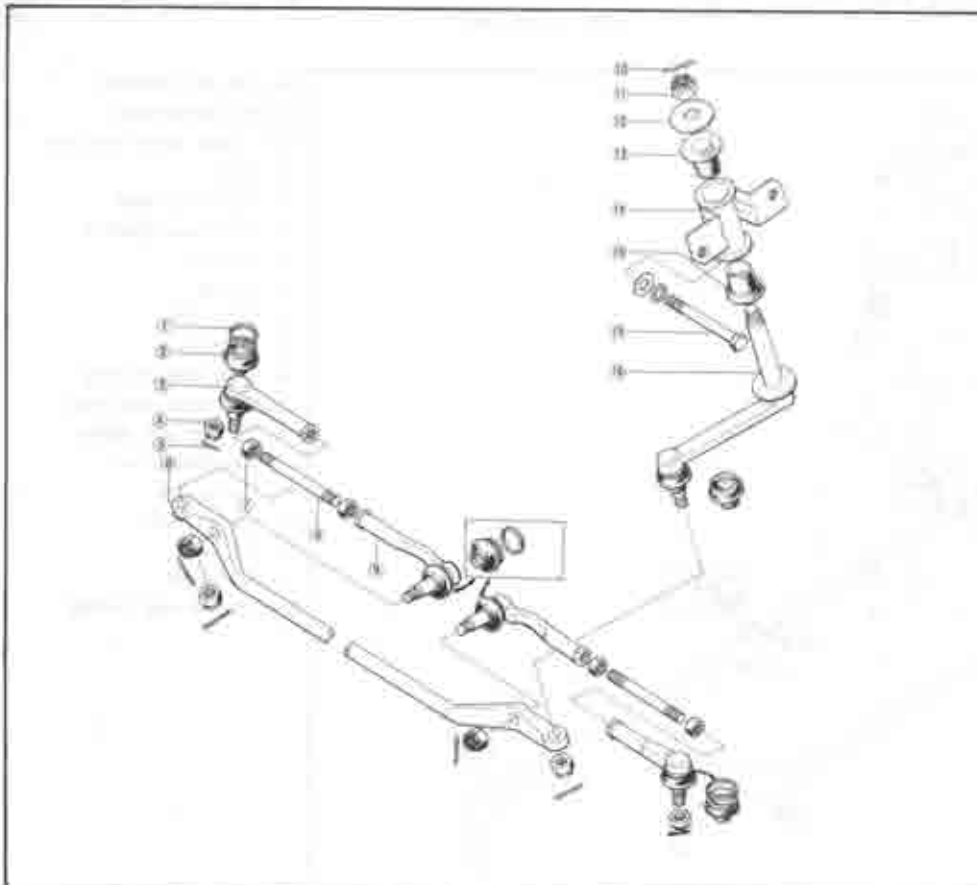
Steering linkage components (Right hand drive vehicles)
